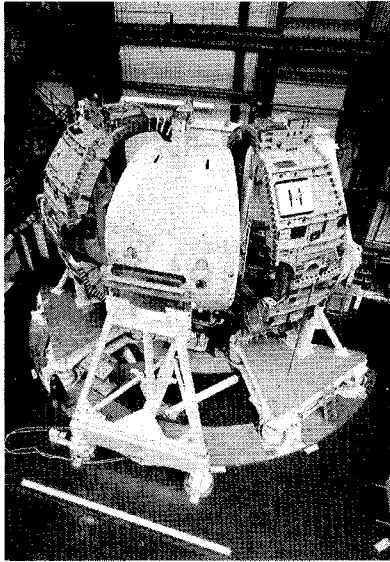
Assembly of a machine octant. The vacuum vessel in between the 2 half octants which are ready to be closed.
